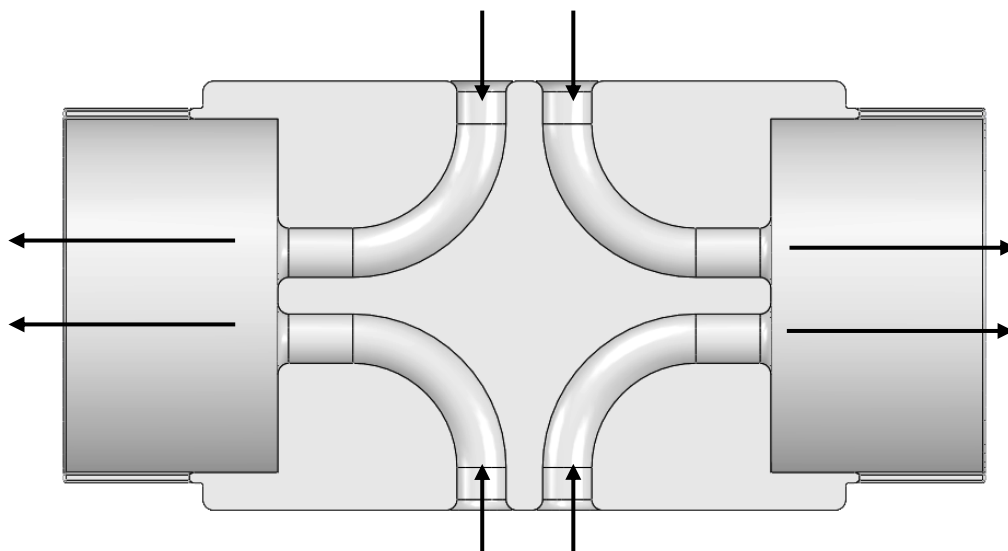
Routing path for the pneumatical material tubing inside the gripper mount
